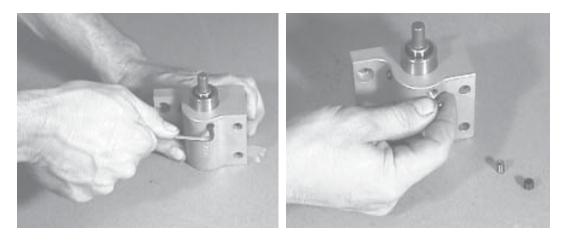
Removing Detent Setscrew (left) and Detent Spring and Ball (right)
